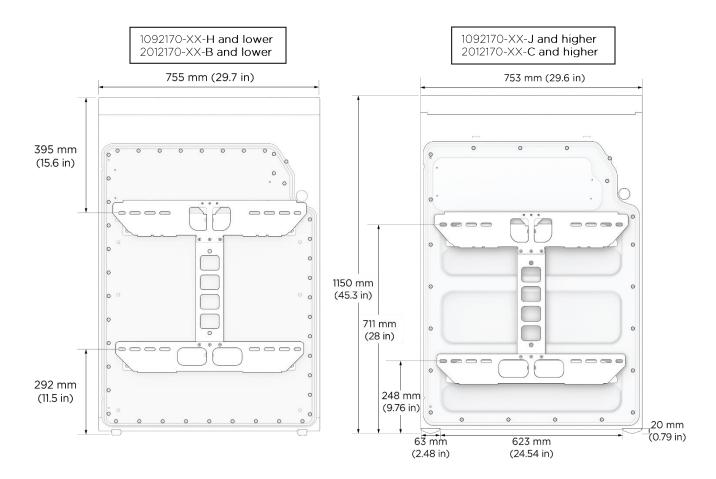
Powerwall 2 Mounting Bracket Dimensions
